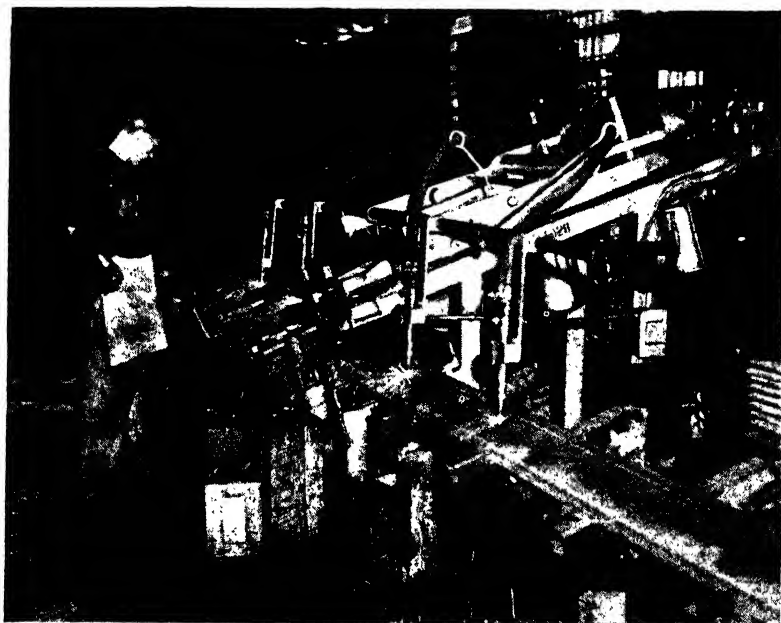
Mass producers of arc-welded products have many typical “job-shop” problems if they build their own special equipment such as this automatic flame-cutting unit. This unit was designed and built to cut special cutter-blade sections from rolled stock. (Courtesy of R. G. LeTourneau, Inc.)
